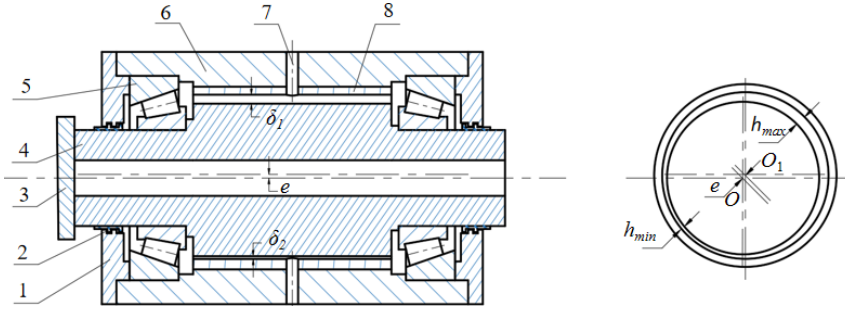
Structure of the rolling-sliding hybrid bearing: 1 – labyrinth ring, 2 – sealing ring, 3 – main shaft flange, 4 – main shaft, 5 – tapered roller bearing, 6 – bearing housing, 7 – oil supply pipe, 8 – bearing bush
